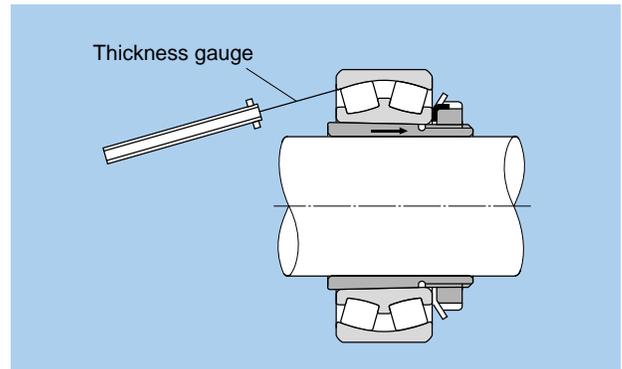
Internal clearance measurement method for spherical roller bearings
